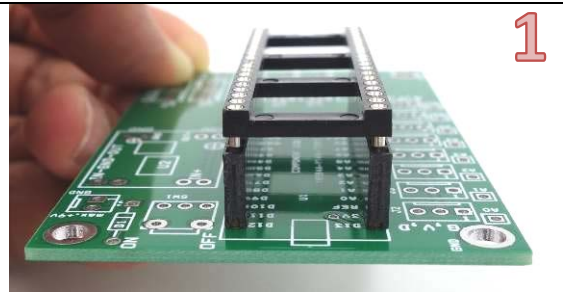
600mil IC socket can be helpful for soldering the 15-pin sockets.
